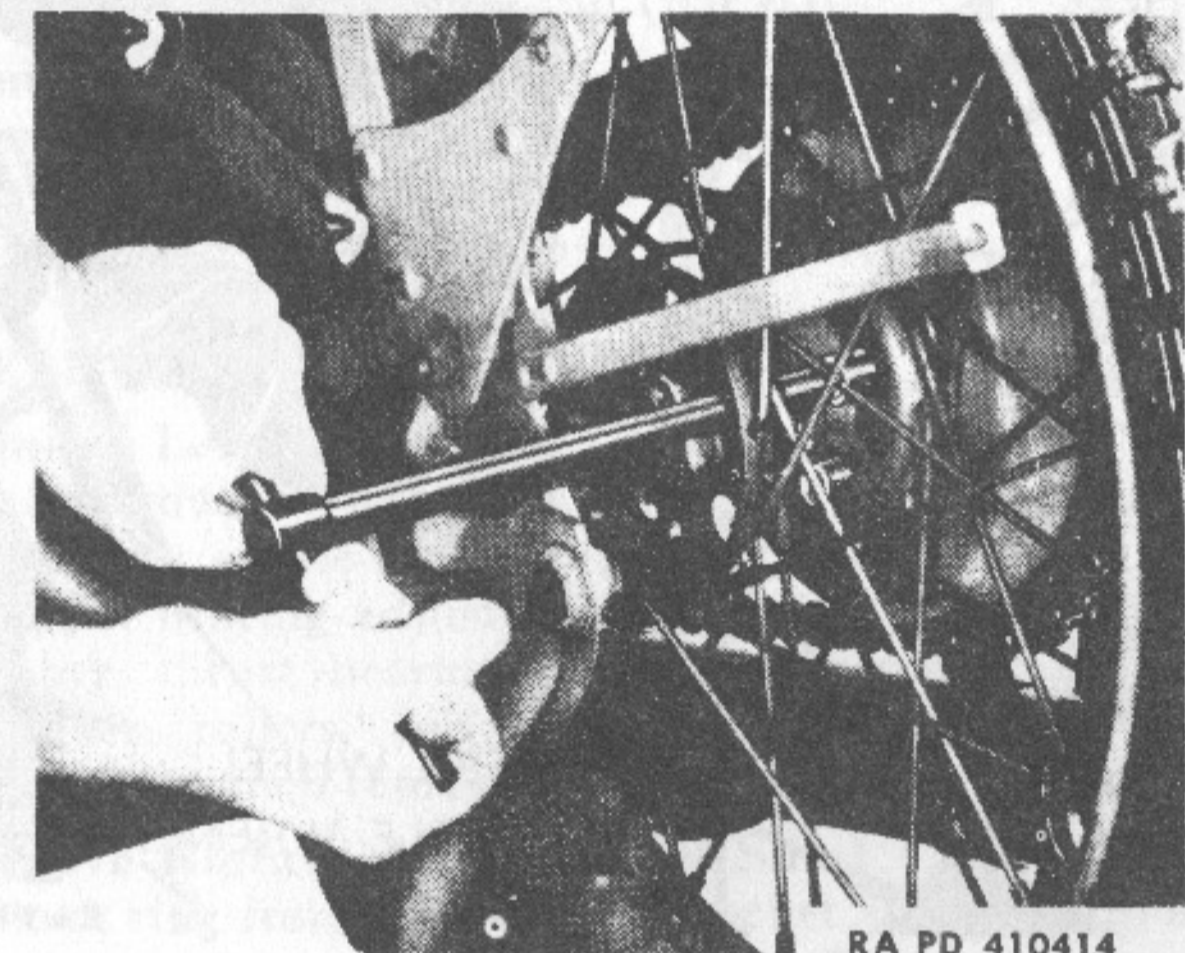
Removing Rear Wheel Mounting Screws with Wrench (41-W-3832)
